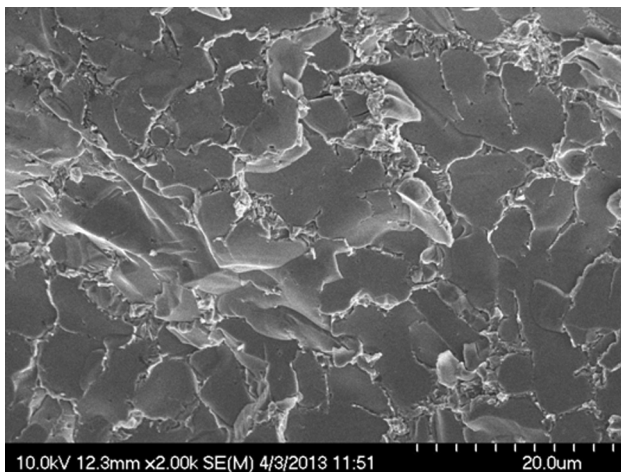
Fracture surface indicating brittle transgranular fracture. 90 deg interface, 17 W, 3000 deg/s. Fractured at 200 MPa, along a surface not corresponding to the material interface.
